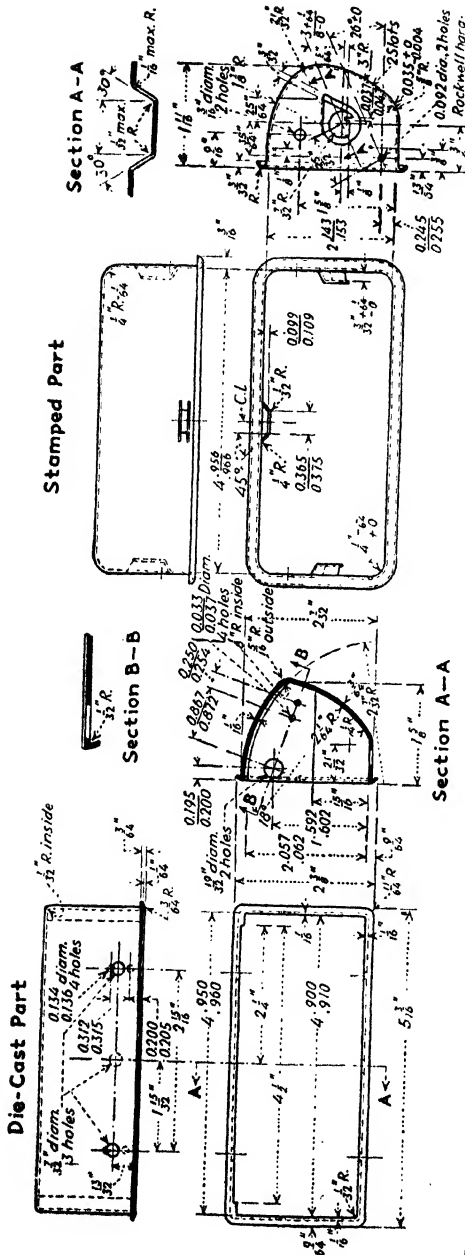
This ash receiver, made to fit into the back of an automobile seat, was produced in both die-cast and stamped form. The former was employed while dies for latter were being prepared, but the stamping is cheaper and lighter in the large quantities required.
